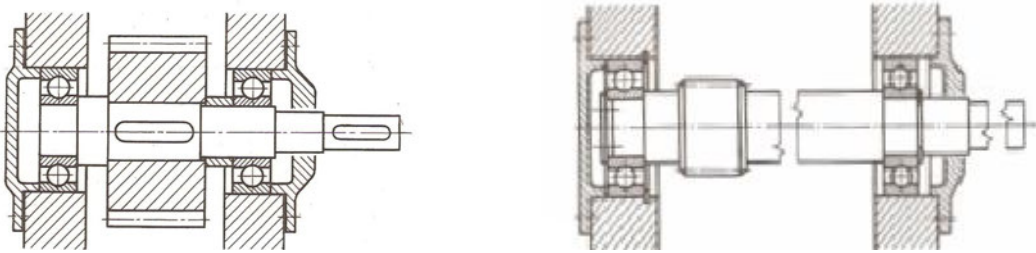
Bearing arrangements for deep groove ball bearings:
